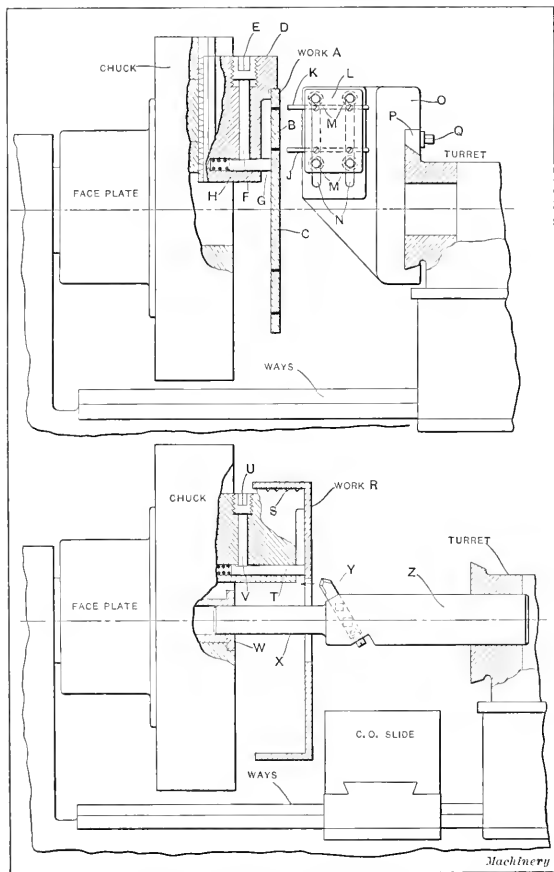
Cutting out a Thin Sheet Steel Collar and turning, boring and facing a Thin Steel Drum
